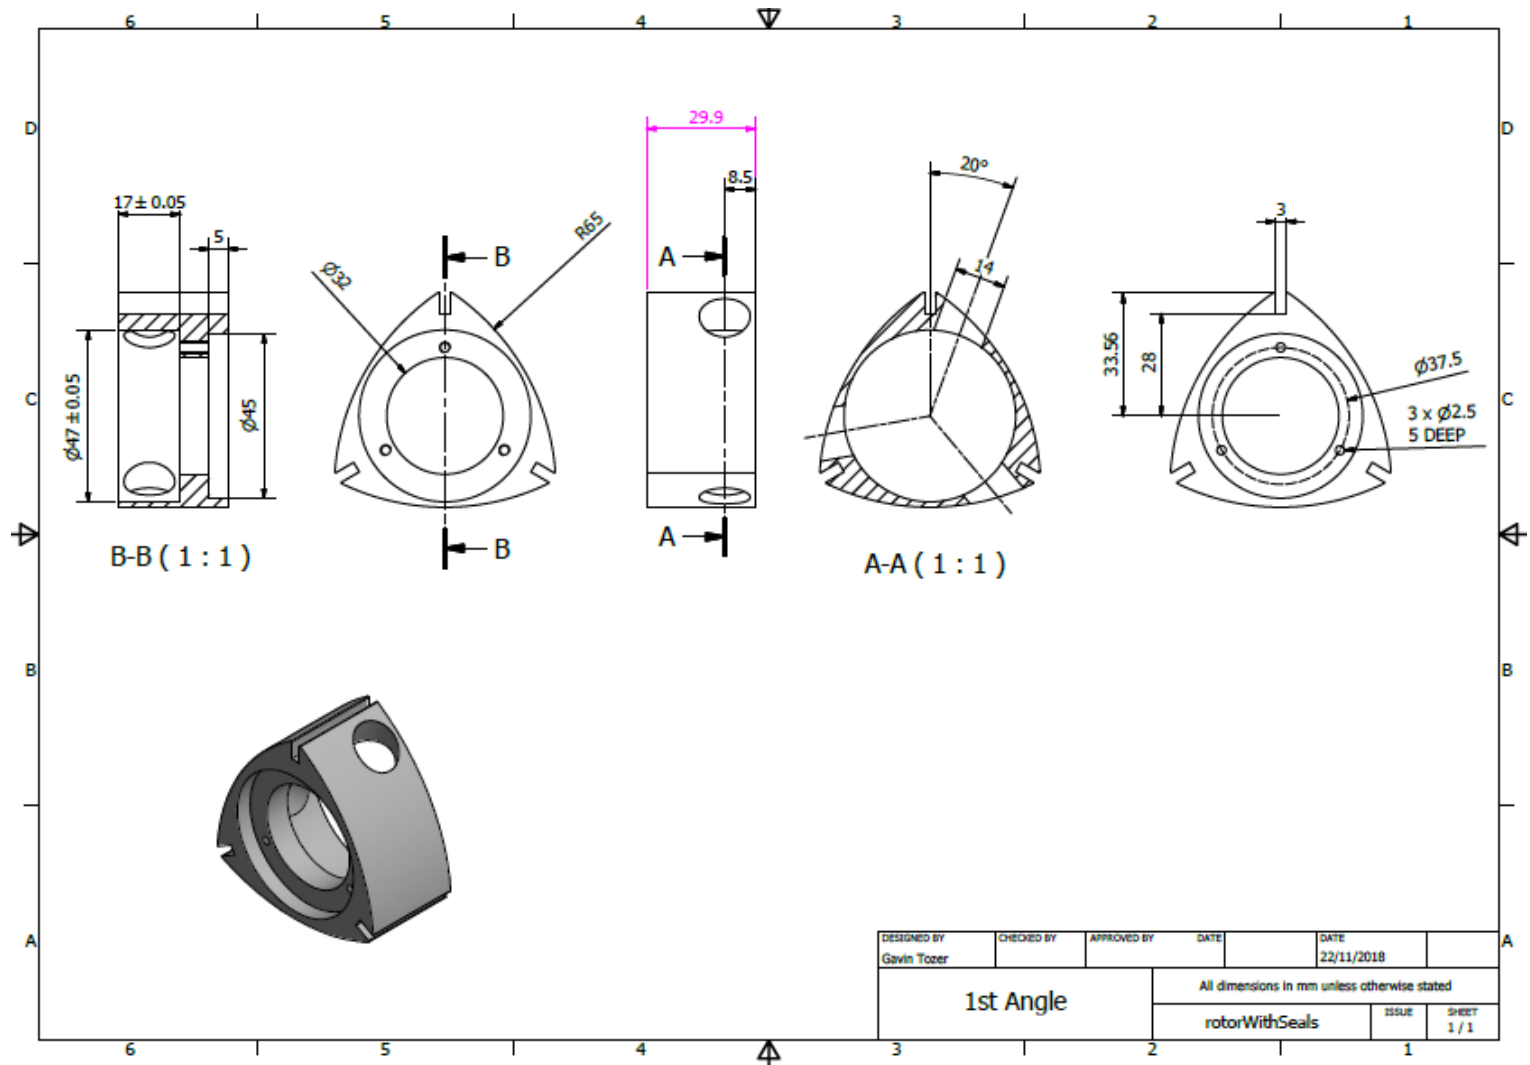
CAD drawing: Rotor mk1 (with apex seals)
